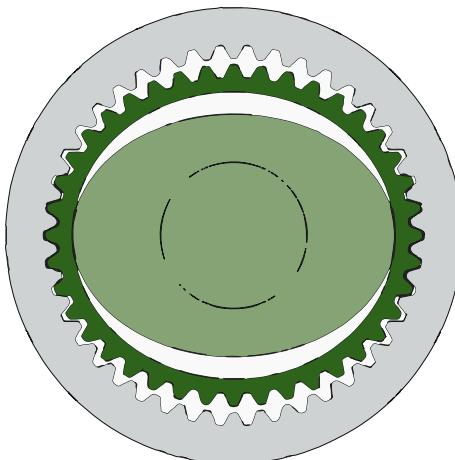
Mechanical engagement of the teeth of a DATORKER® shaft gear unit
